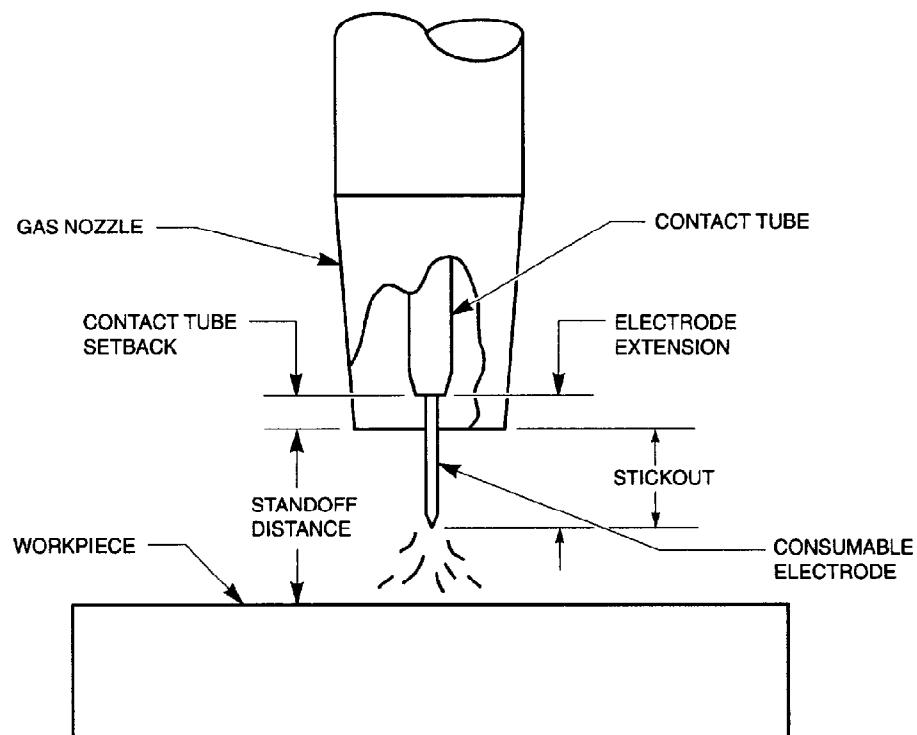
Gas Metal Arc Welding Gun Nomenclature
